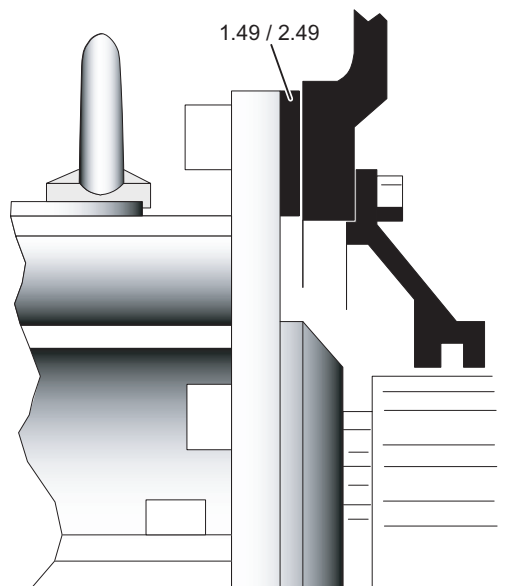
Shims/spacers between the bearing housing and bearing end shield
